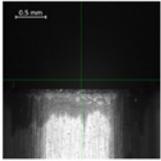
WP2 Gear Shaft B, Gear B 0 Gears produced Tooth 1—Tip (left) Face (right).
